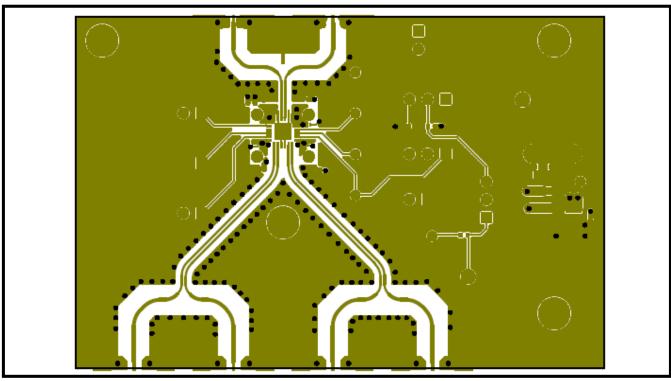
MAX3942 EV Kit PC Board Layout—Component Side
